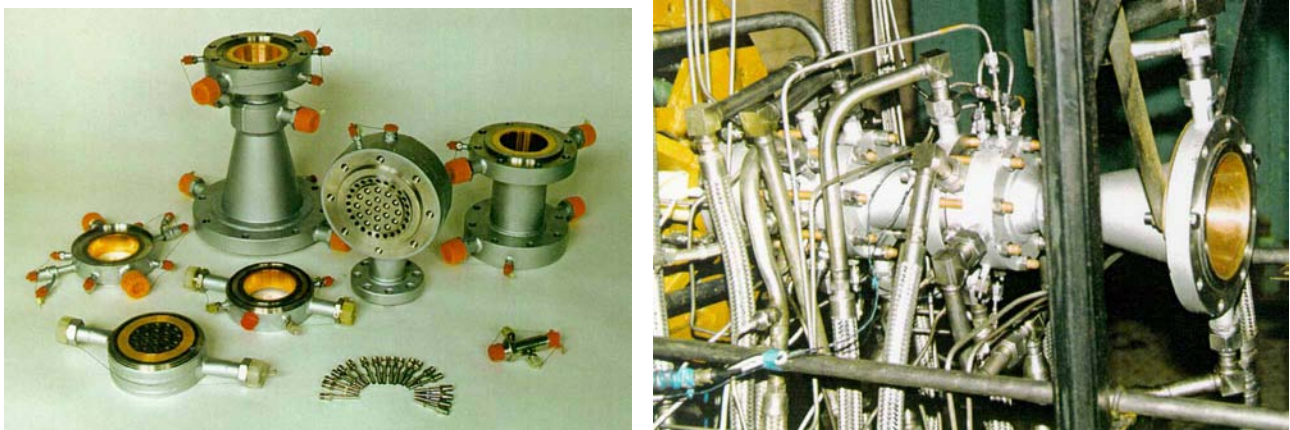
Subscale chamber and injection head parts (left) and assembly on test bench (right)
